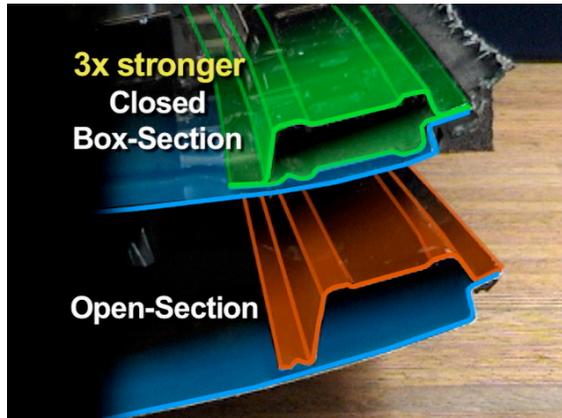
Closed box-section roof headers are about 3 times stronger than open-section headers.
